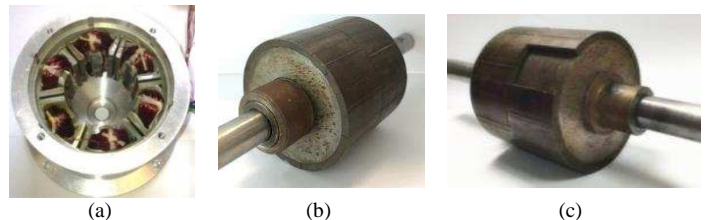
The prototype 12-slot/10-pole modular PM machines. (a) The modular stator, (b) the healthy rotor, (c) the defective rotor.
